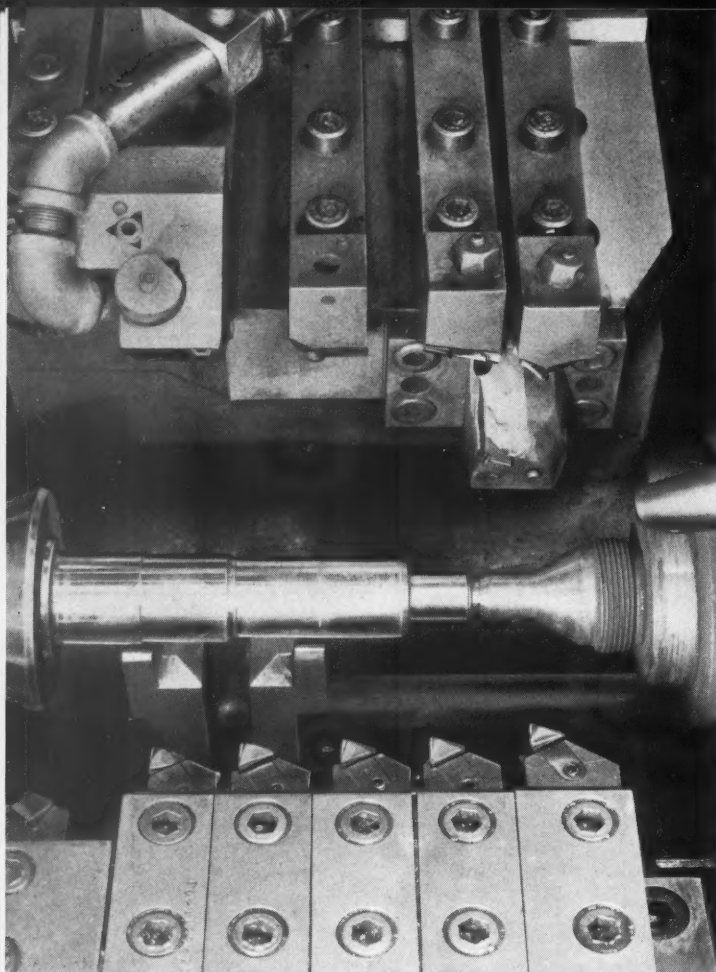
(Left) Close-up view of the tooling area on the automatic lathe seen in heading illustration and in Fig. 2. Thirteen carbide tools remove 2 pounds of metal in twelve seconds
